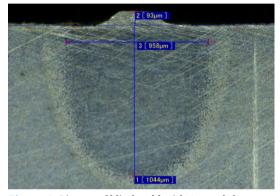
Picture of blind weld with 1 mm defocus
